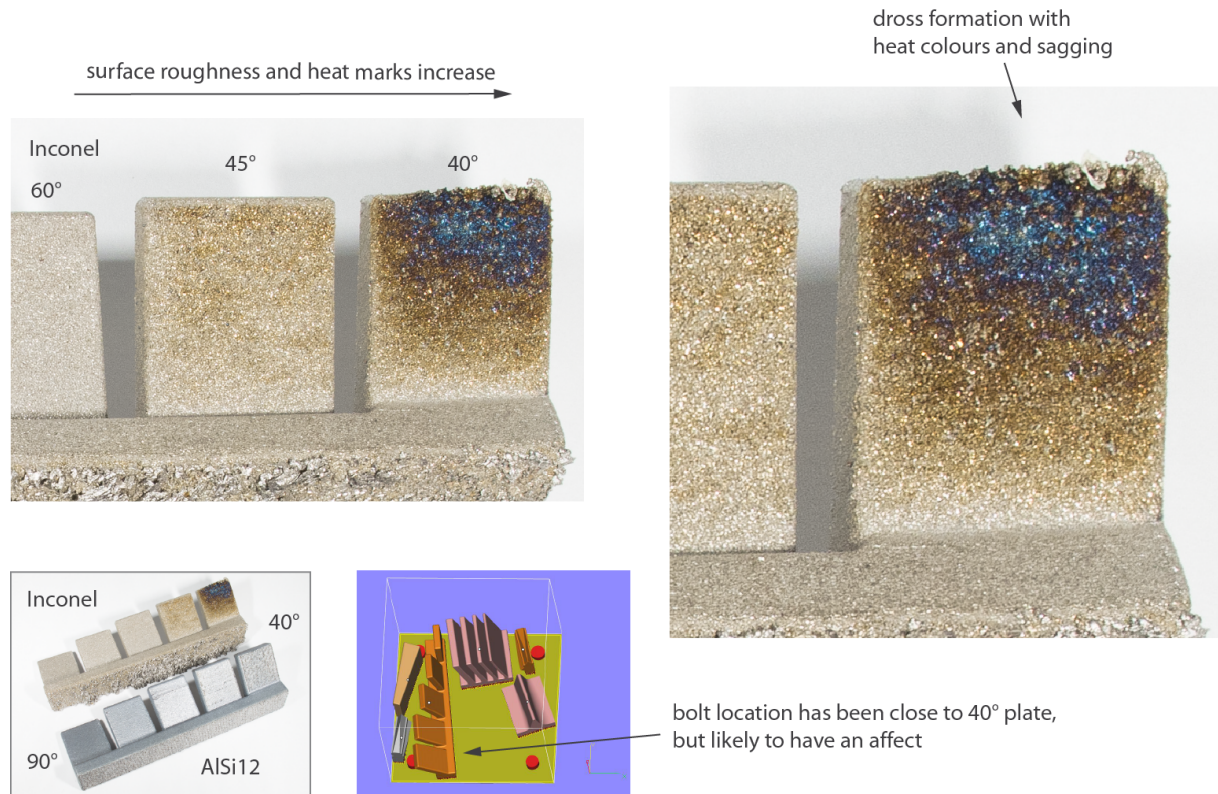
Evaluation of the inclined plates –test serie prints for AISi12 and Inconel printed at the SLM125 factory settings spring 2015.
